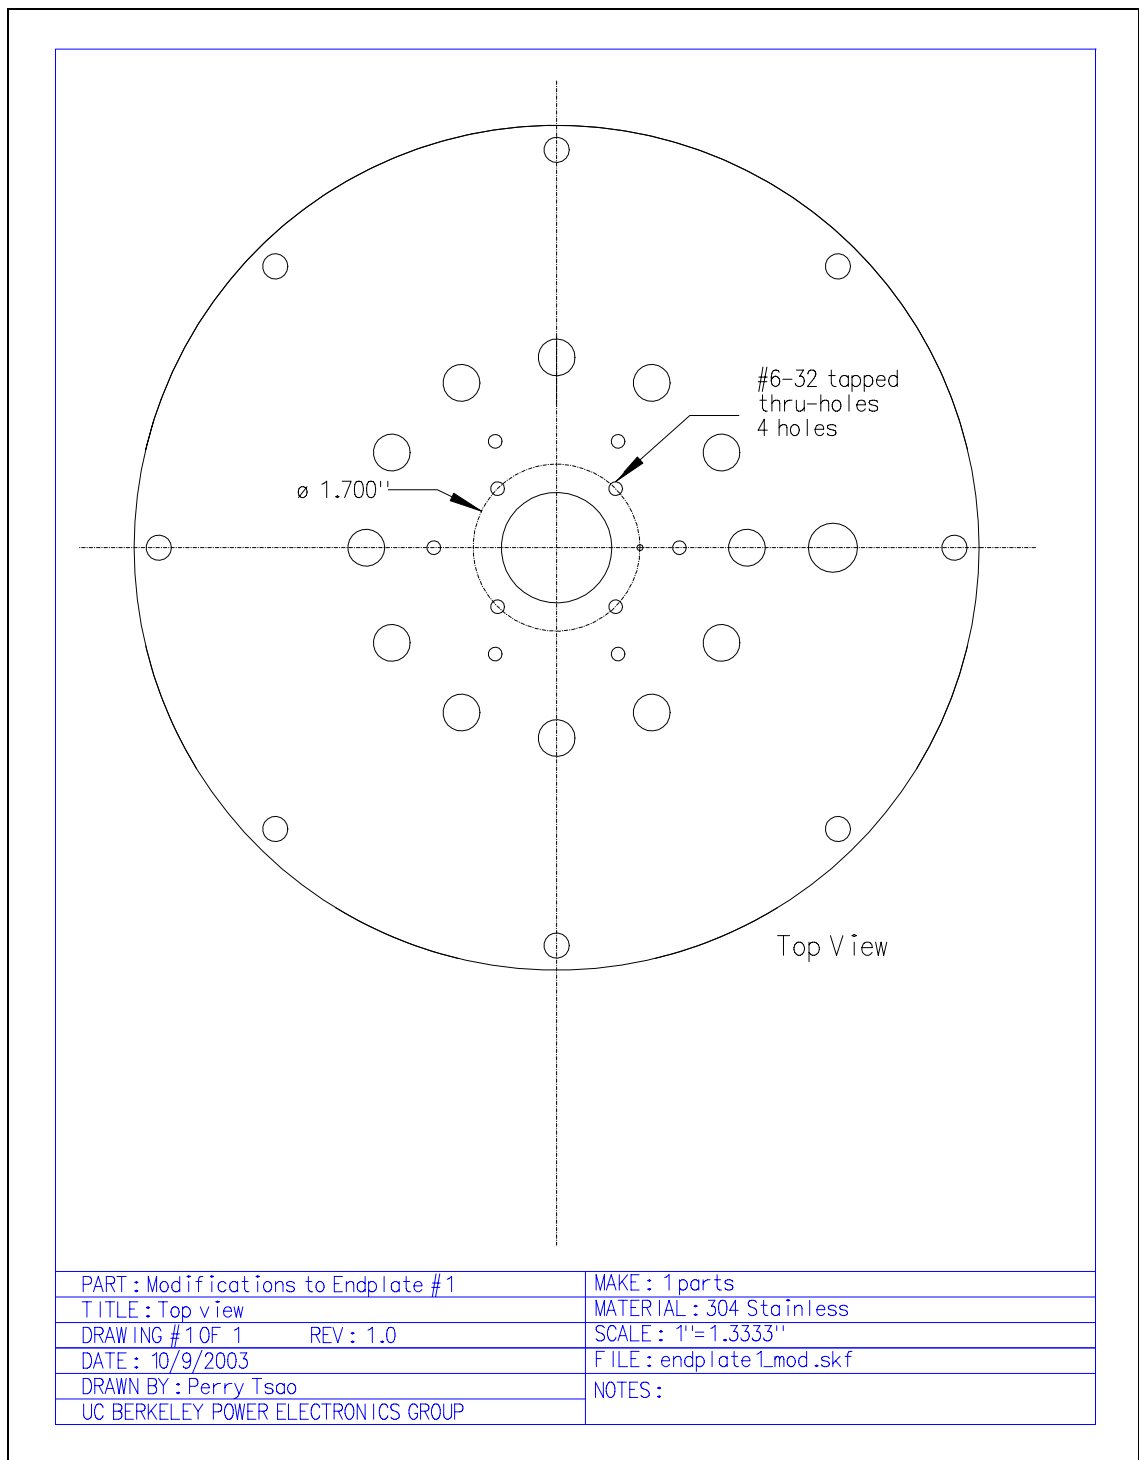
Drawing of modifications made to endplate #1. These modifications were made to allow the mounting of a retainer for the tolerance ring.
